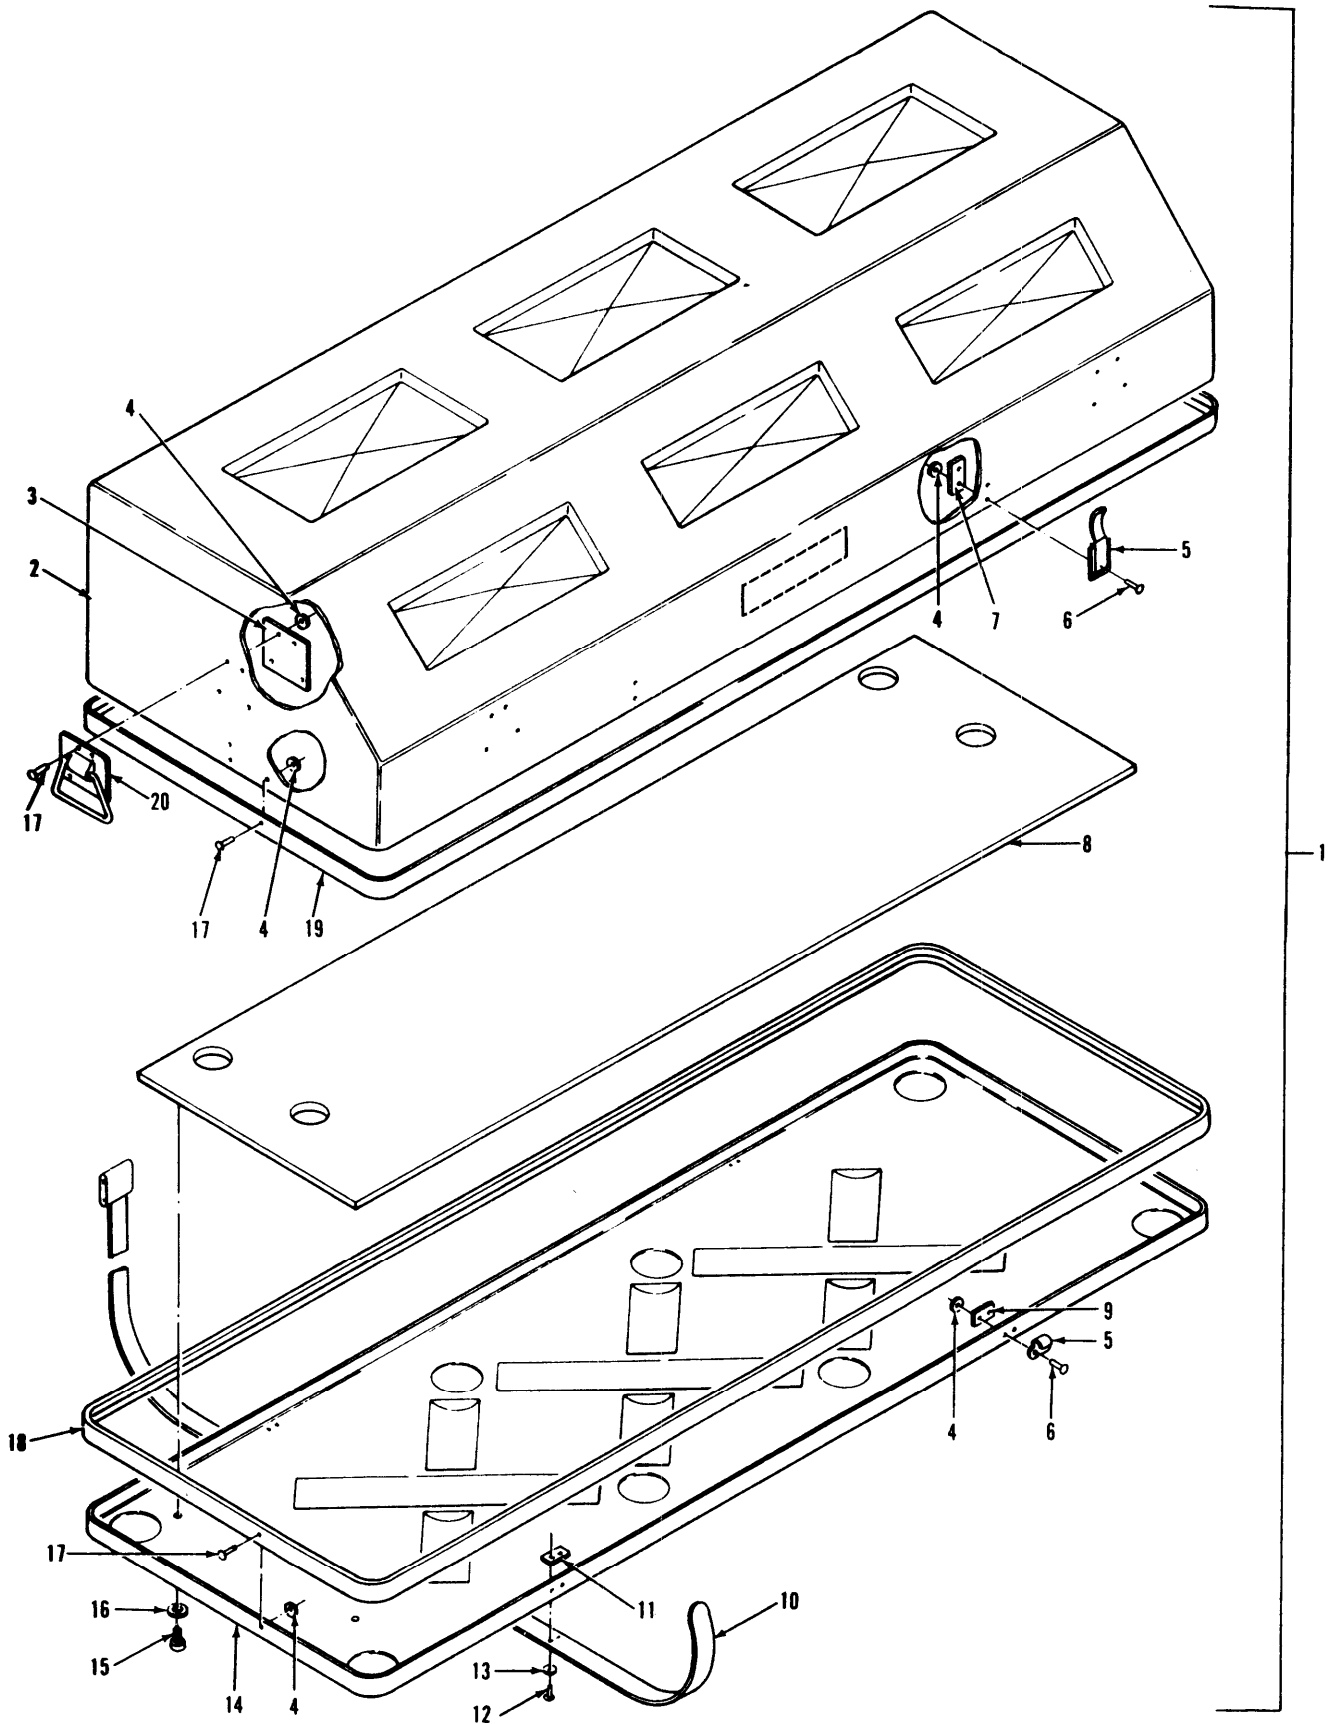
Carrying Case Assembly (Sheet 1 of 2)
